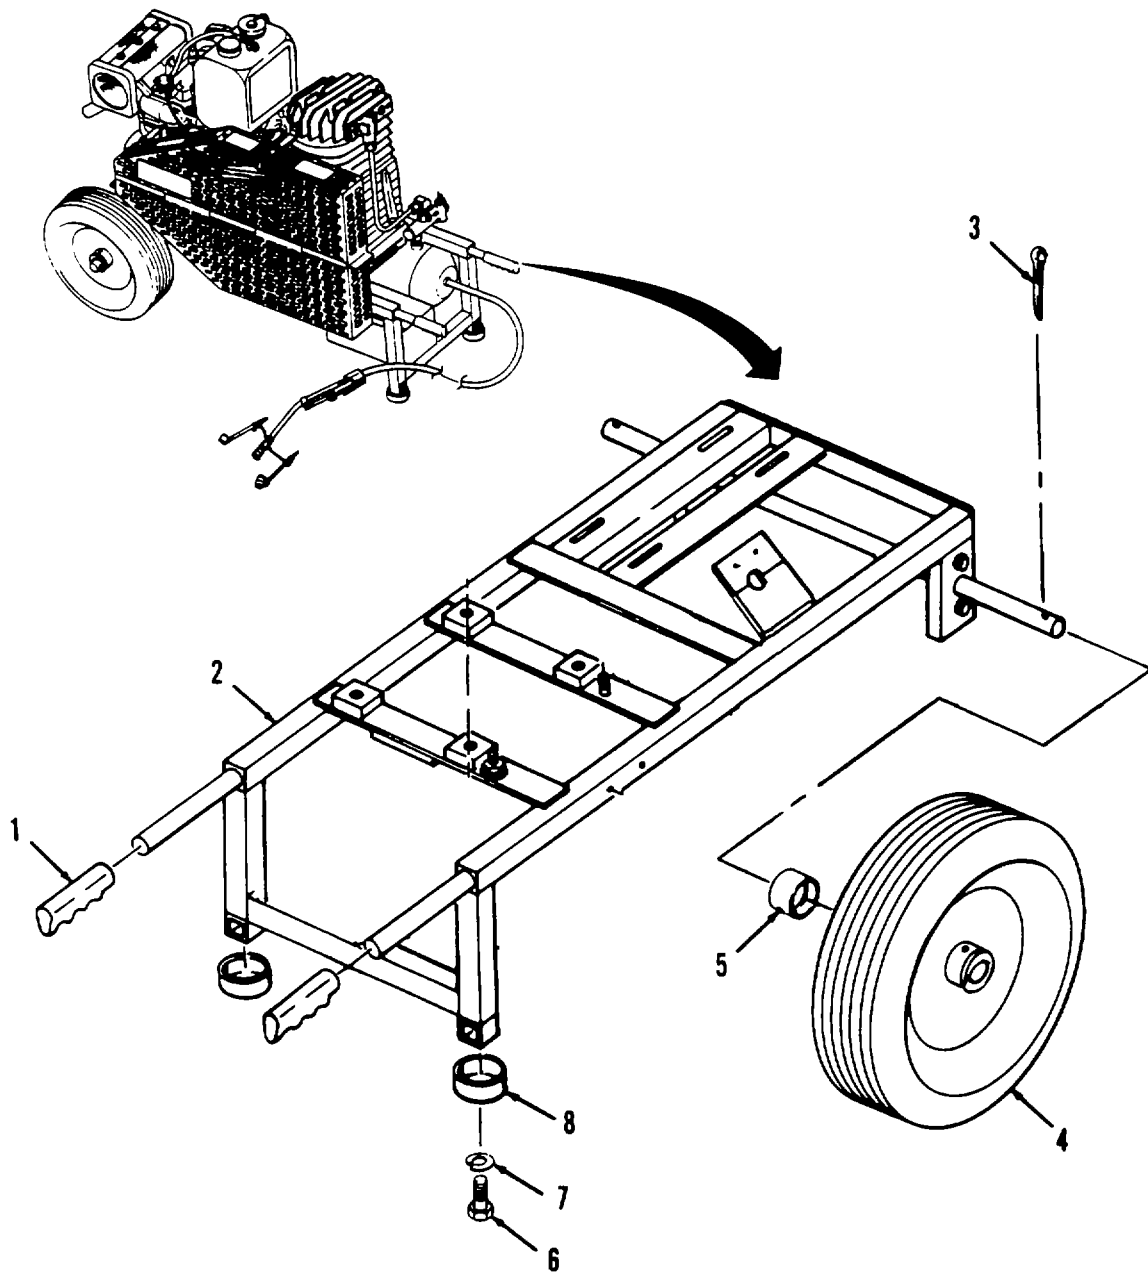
Handle Grips and Tire / Wheel Assemblies Replacement.
